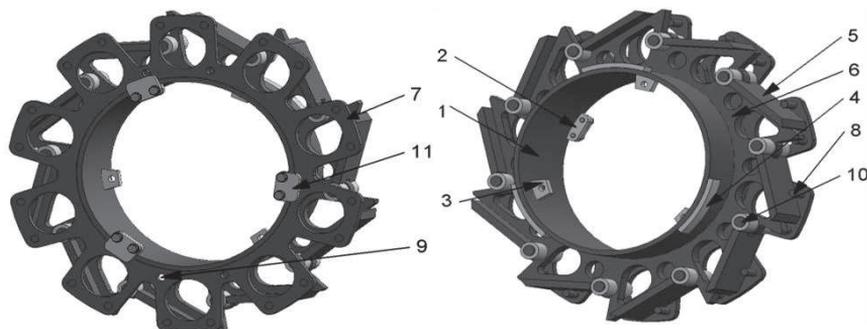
Wheels equipped with auto-extensible blades: 1 – support tube, 2 – locking tab, 3 – bracket fastening the mechanism to the wheel disc, 4 – spacer plates, 5 – blade, 6 – driving disc, 7 – blade control disc, 8 – guide pin, 9 – locking hole, 10 – blade pin, 11 – buffer plate.
